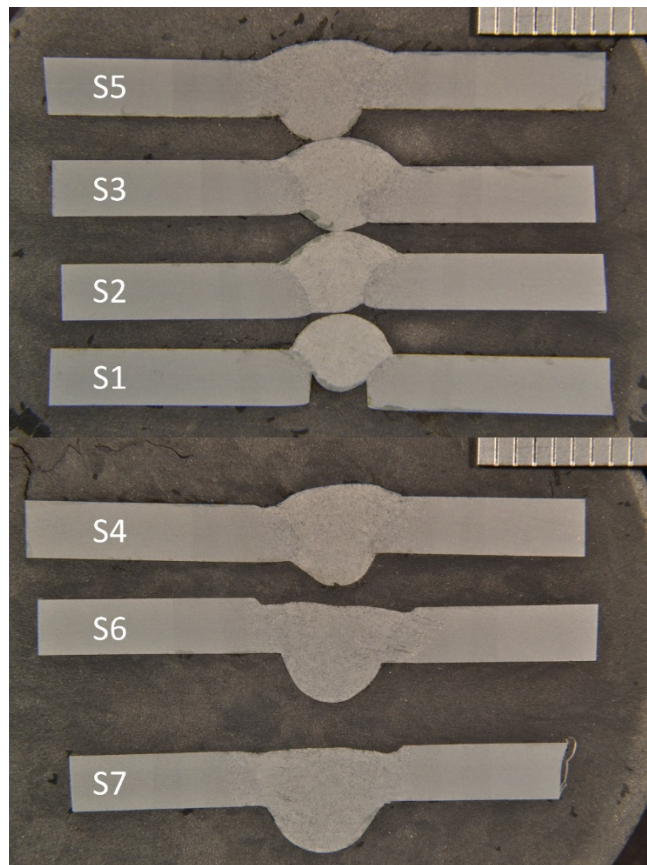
Weld macrographs of samples S1 through S7.
